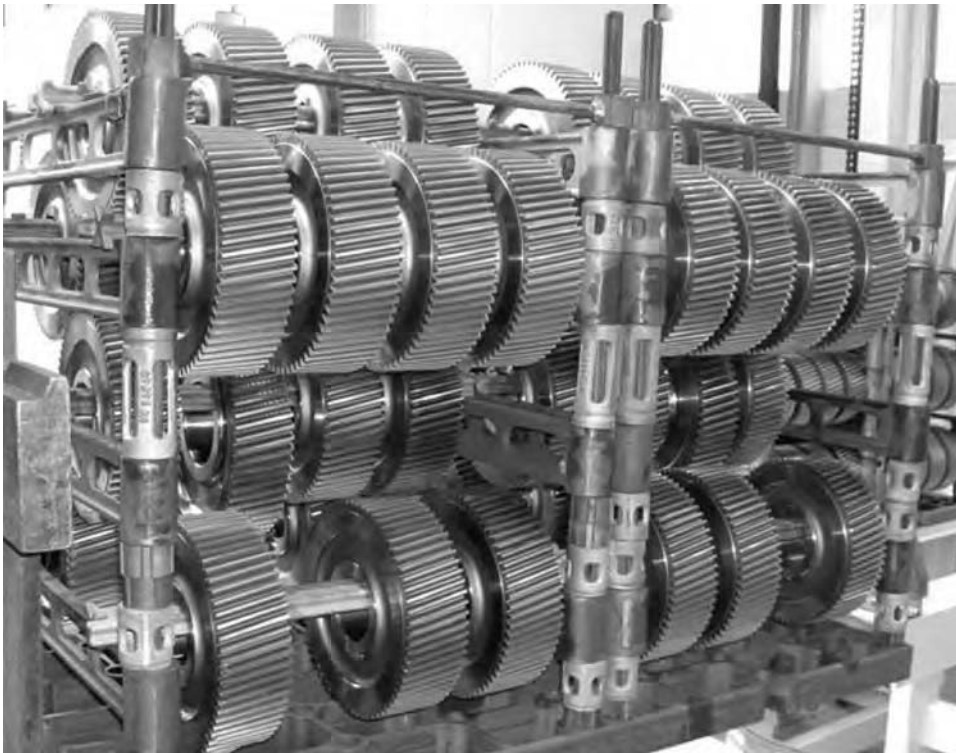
Load configuration for low-pressure carburizing of ring gears. 16MnCr5 gear wheel; 44 parts per batch; cycle time, 450 min; carburizing temperature, 930 °C (1705 °F); helium, 18 bar (13,500 torr); case-hardening depth, 0.85–0.95 mm (0.034–0.037 in.); core hardness, 27–30 HRC
